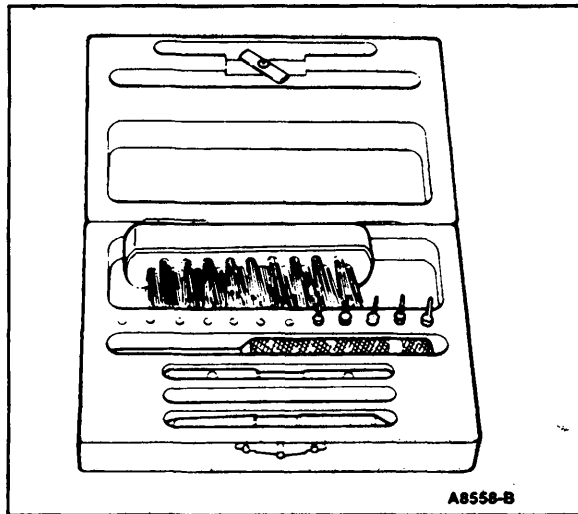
Rotunda 014-00301 Injector Nozzle Cleaning Kit Special Service Tool D83T-9000-G
